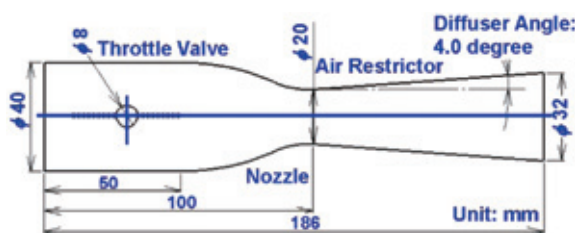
Dimension of Air Restrictor (Three-Dimensional Solid CAD Model) [Shape 05, Diffuser Angle: 4.0 [degree]]
